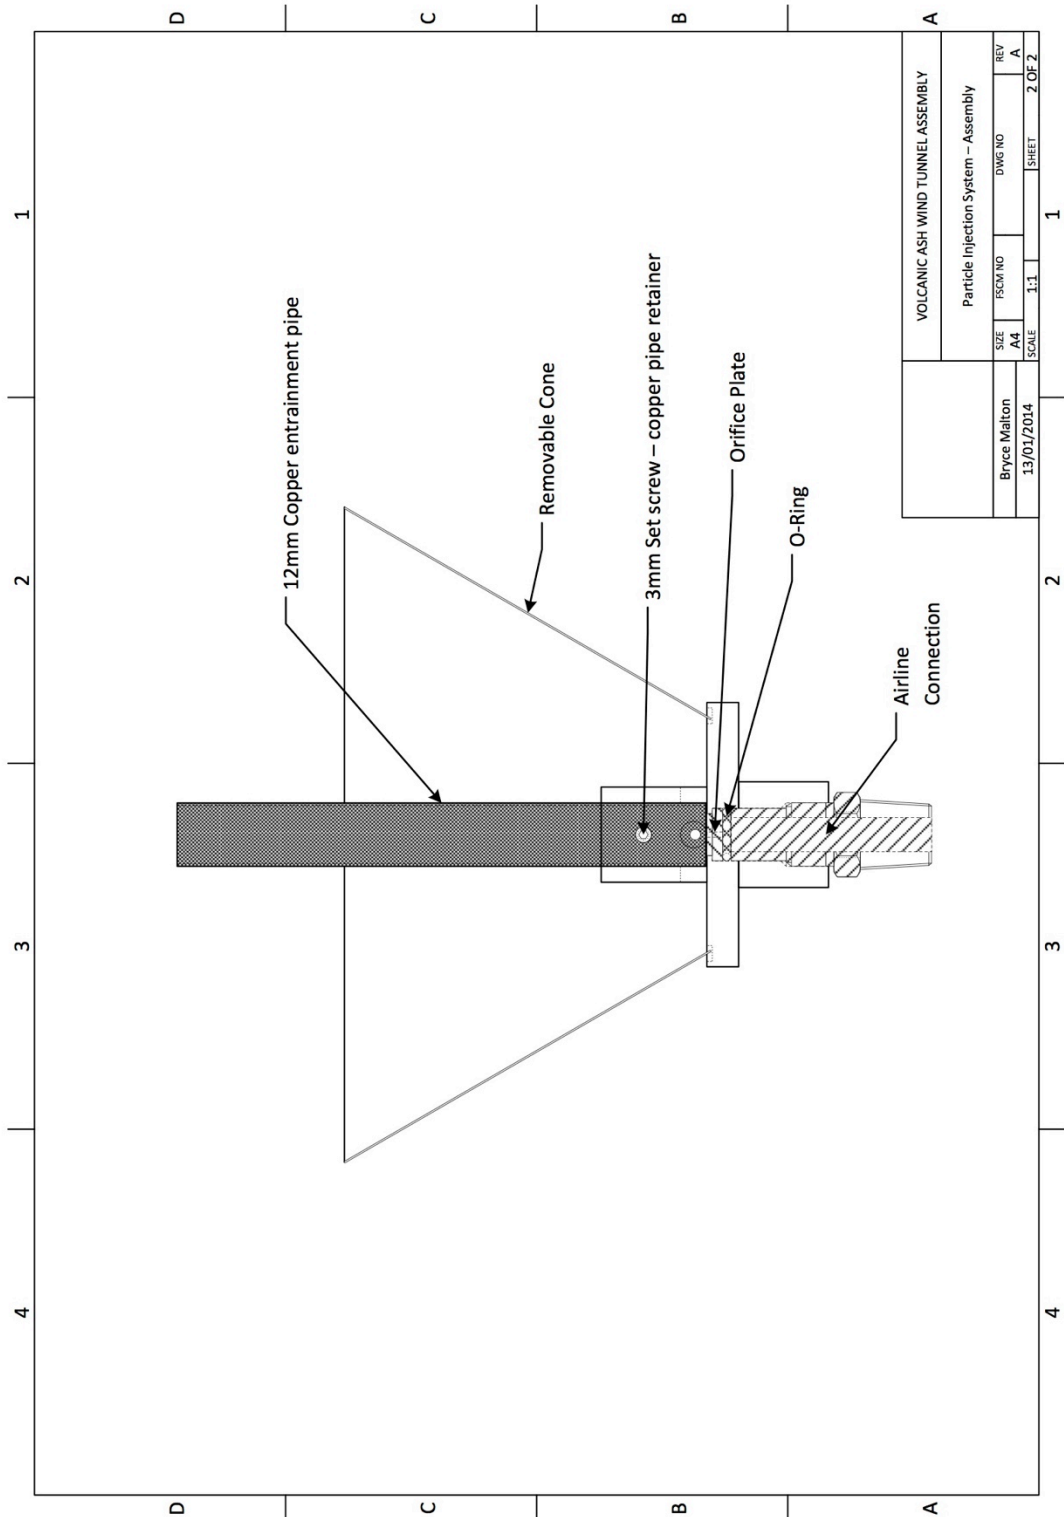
Revision 1 high-pressure air nozzle general assembly.
